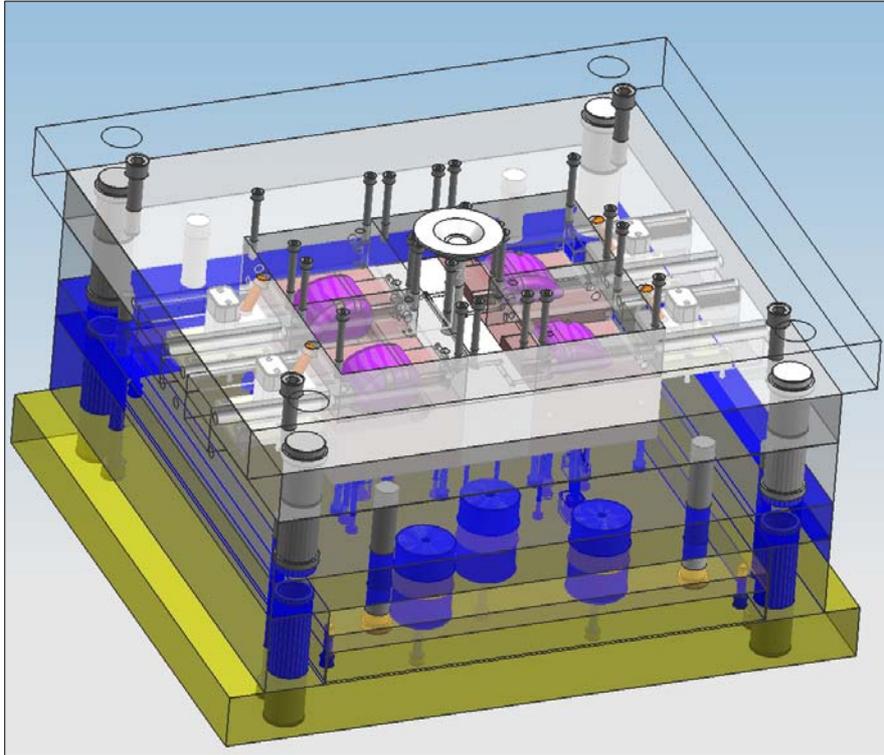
The injection mold 3D MCAD project, designed with UGS Unigraphics NX4 Mold Wizard tool
